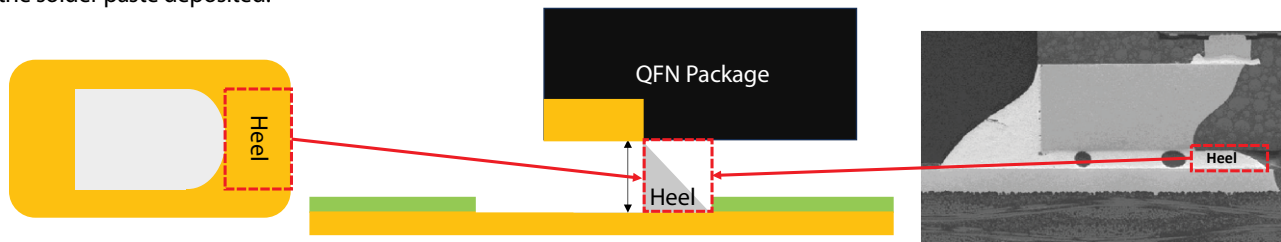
Illustration of the impact of the solder at the heel on stand-off height
